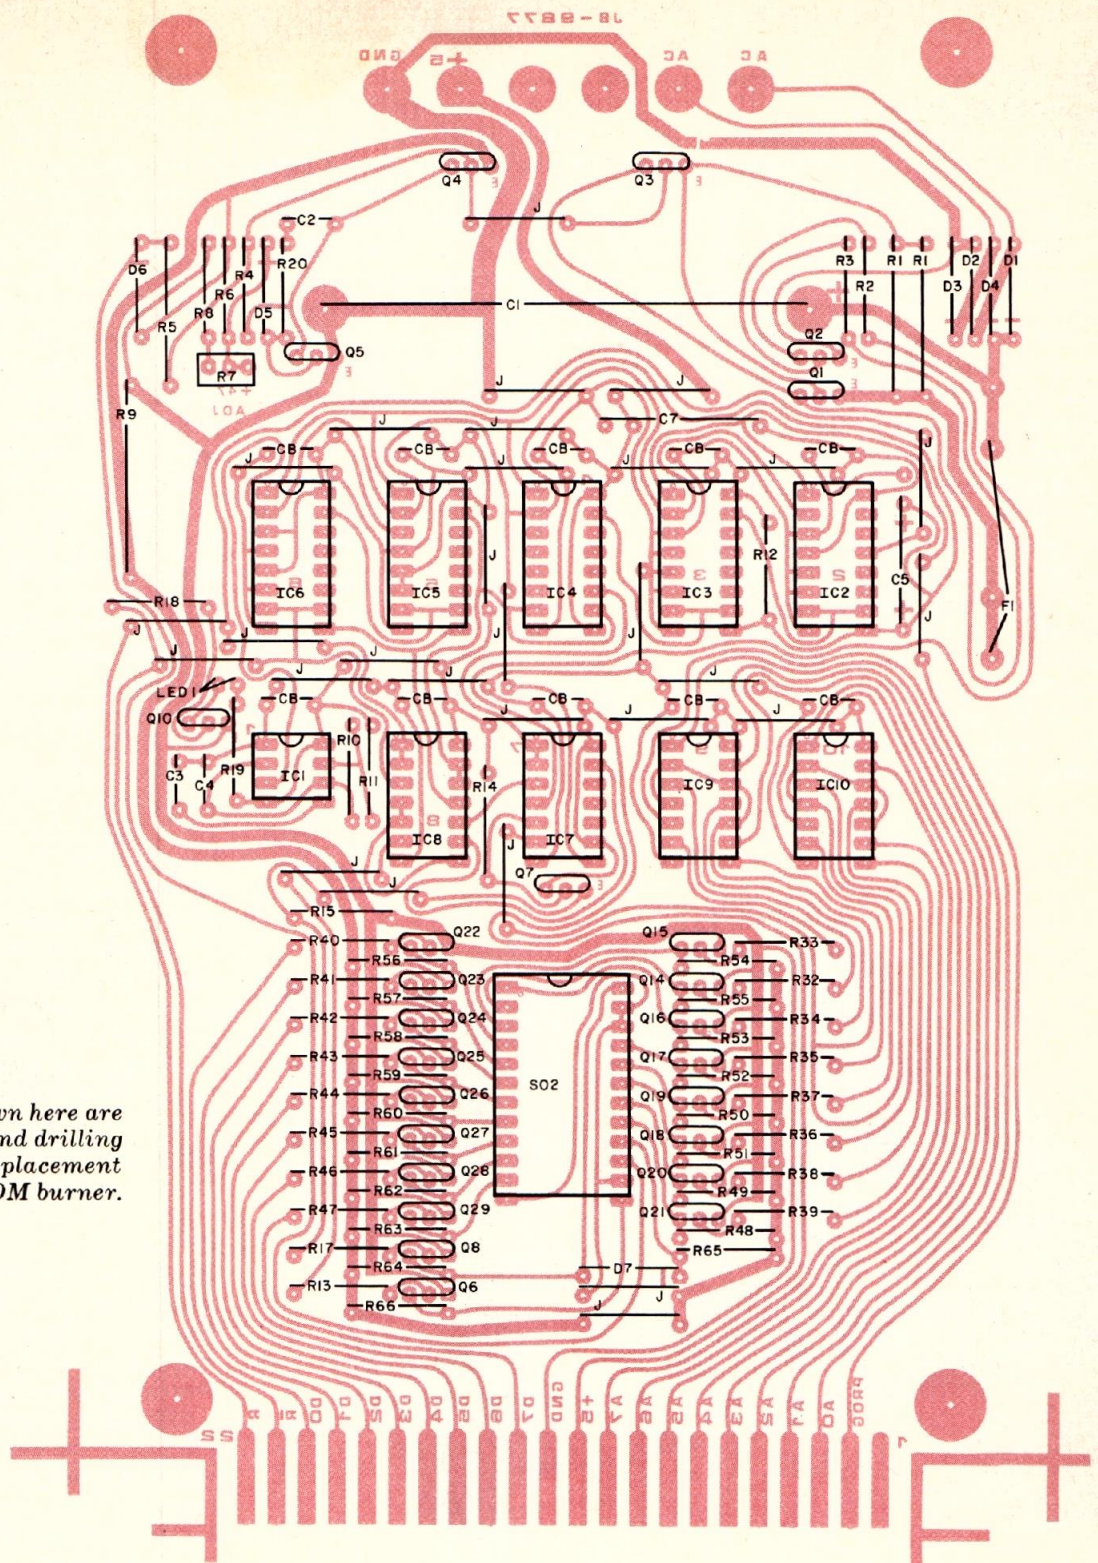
Shown here are etching and drilling and component placement guides for PROM burner.
